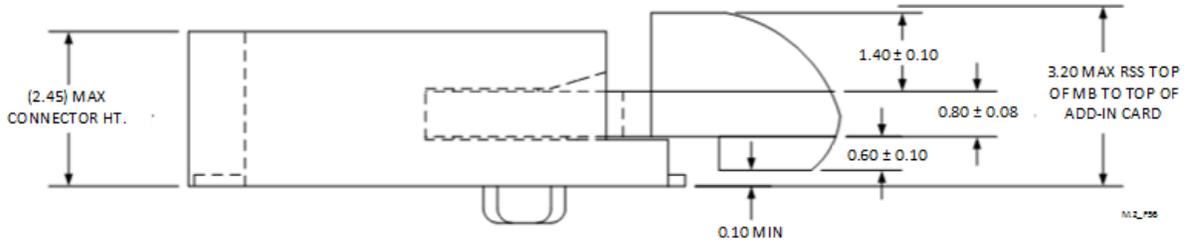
H2.8-D4 – Stack-up Top Mount Double-sided Add-in Card for 1.5 Maximum Top-side Component Height with 0.7 Maximum Bottom-side Component Height
